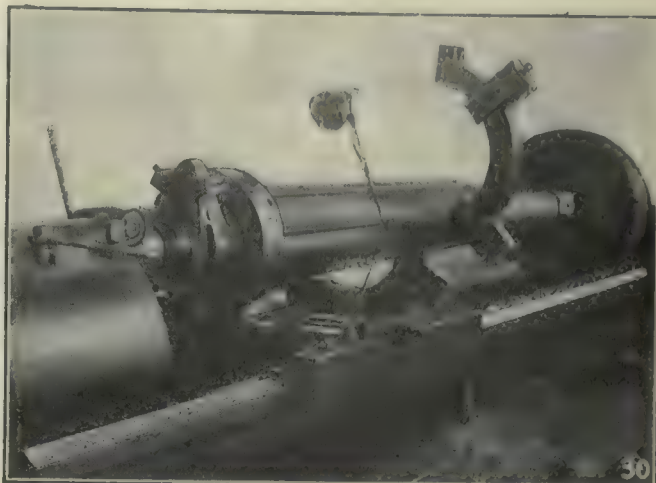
OFF-CENTER PLUG USED IN SETTING UP FOR BORING BREECH.
